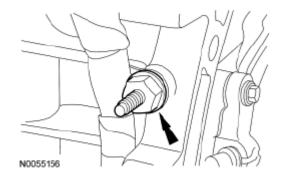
Locating Wiring Harness Retainer Stud Bolt Courtesy of FORD MOTOR CO.
